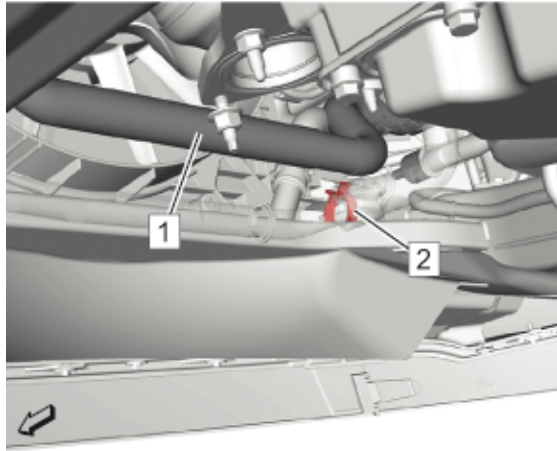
Drive Motor Battery Coolant Cooler Inlet Hose And Retainer
